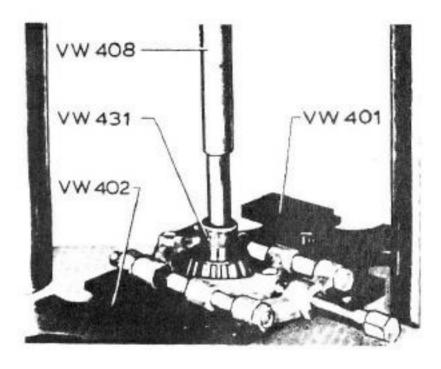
Separator device for pressing off late-type inner race of pinion tapered-bearing.
